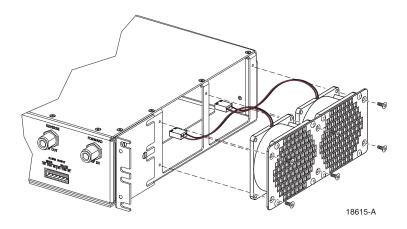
Host Unit Fan/Grill Assembly Removal
